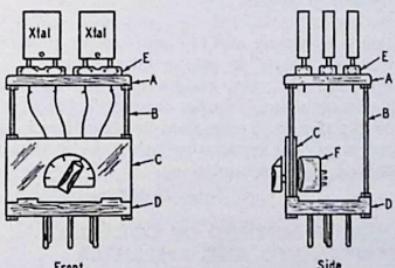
Constructional details of a simple multiple crystal holder. The unit makes use of a 5-prong plug-in-coil base, and will hold up to six of the small-size crystal holders. A, C — sheet of  $\frac{1}{4}$ -inch transparent insulating material; B —  $\frac{5}{32}$  threaded brass welding rod; D — 5-prong coil base (National PB-10); E — ceramic crystal socket; F — six-position selector switch.
